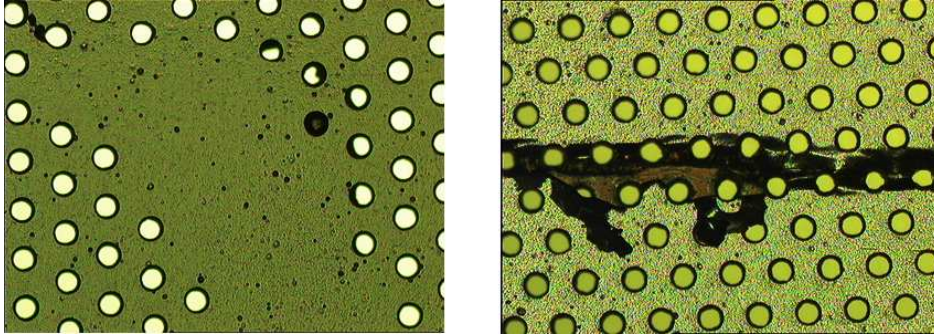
Typical GEM defects: top) closed holes; bottom) over-etching of the copper layer.
